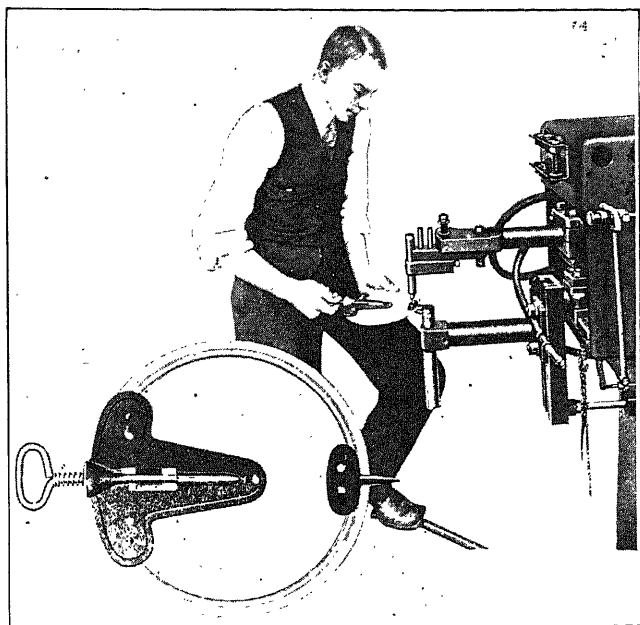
Welding Stove Pipe Dampers.
